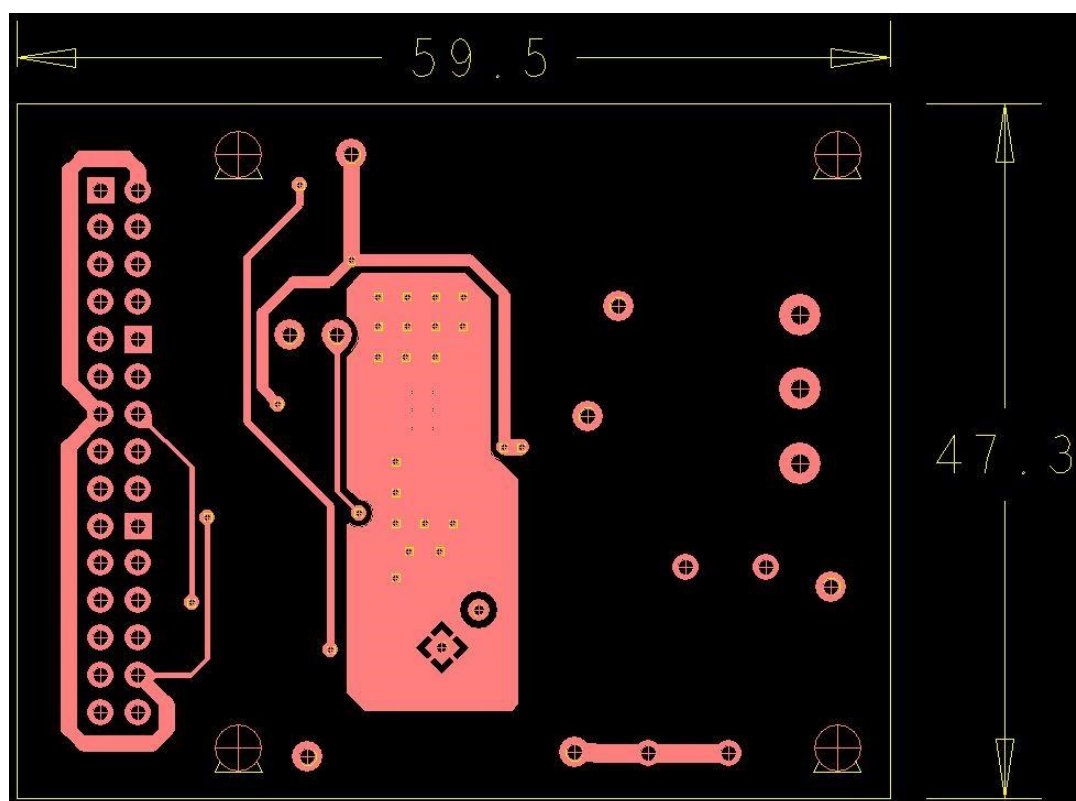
STEVAL-IFP034V1 layout (bottom view)
